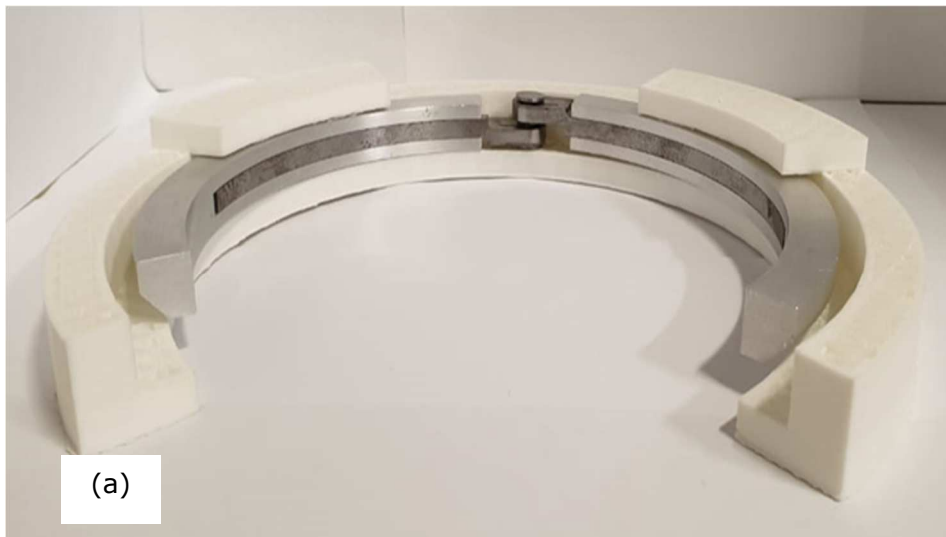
Completed 3D printed models of moulds (Acrylonitrile-Butadiene-Styrene) for non-threaded tool joint to physically simulate what the Pin and Box grooves would look like and how the Snap-Latch Ring would behave inside them, for Prototype II.
